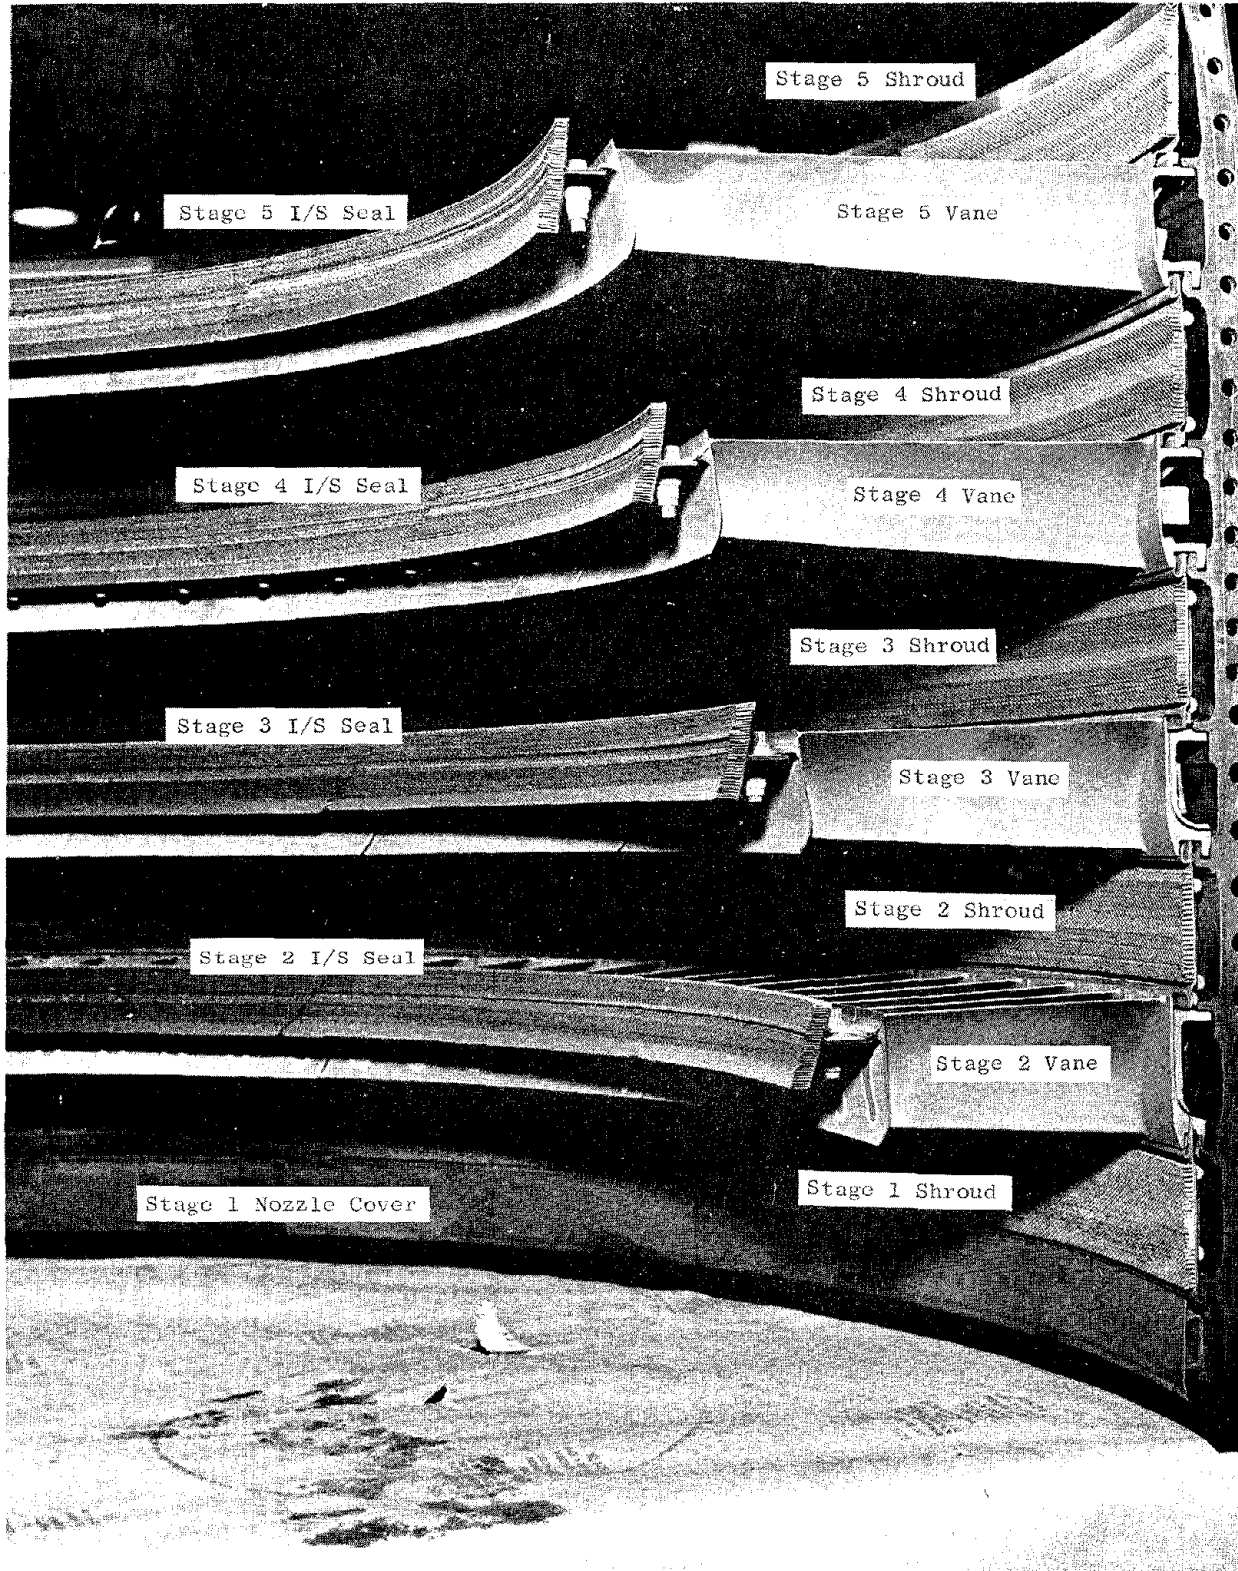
LP Turbine Stator Assembly, End View of Shroud and Seal Rubs.
